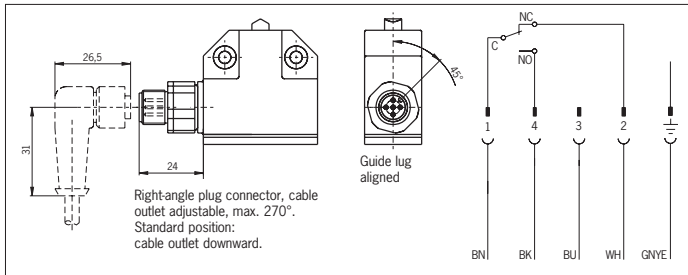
Dimension drawing/connection diagram NO1.550SVM5 with plug connector M12 (SVM5, 5-pin)
